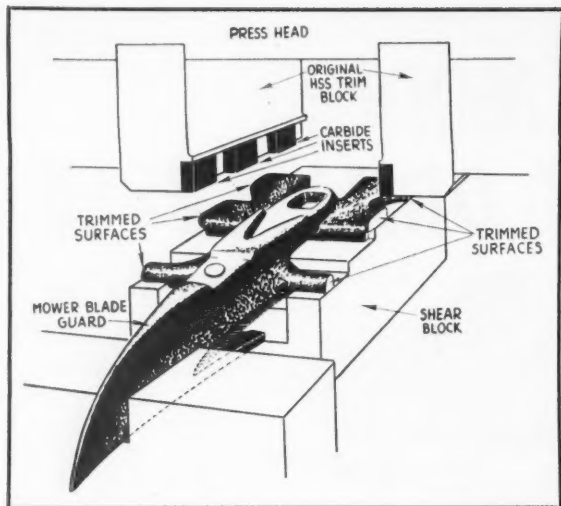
Line drawing of steel casting in shearing position in die, showing the carbide inserts that are brazed in steps in the original steel trim blocks
